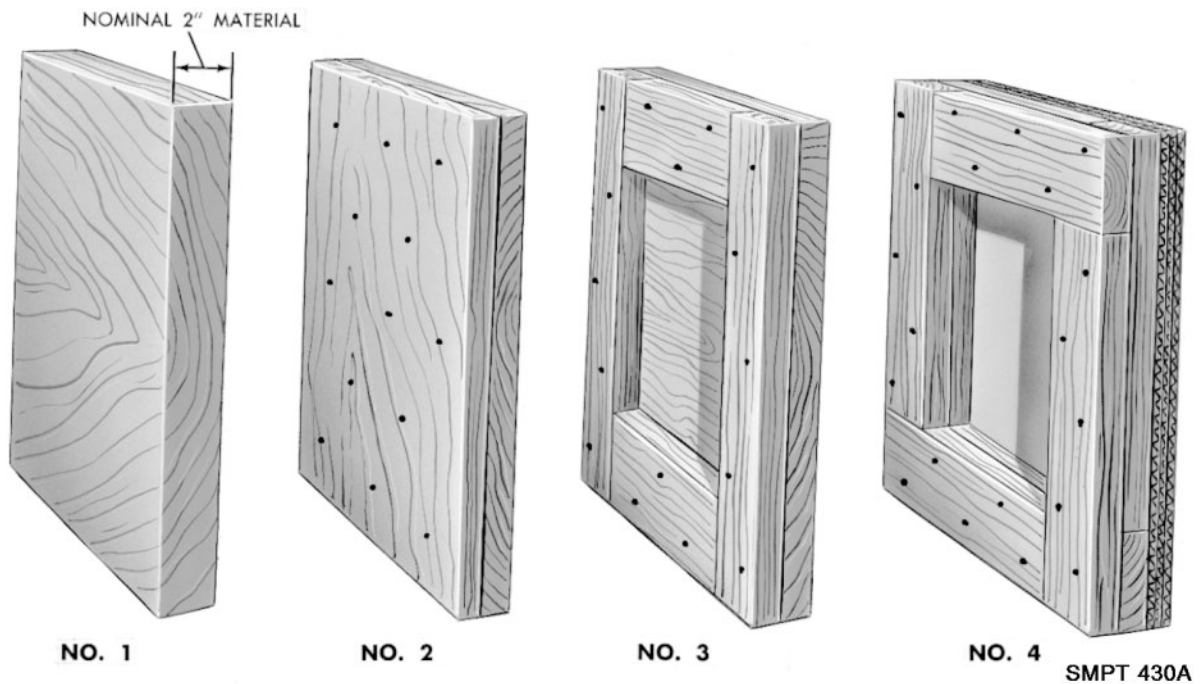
Types of ends to be used with styles A through D triple-wall corrugated fiberboard boxes.
